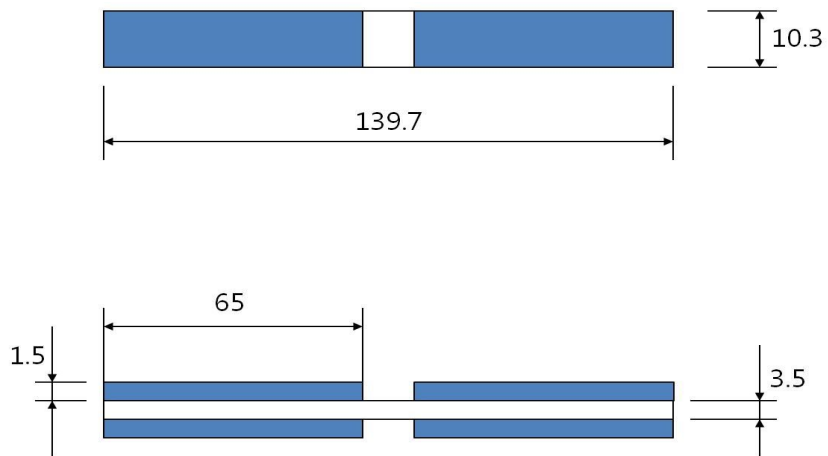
Dimension and Shape of Compression Specimen 0°
